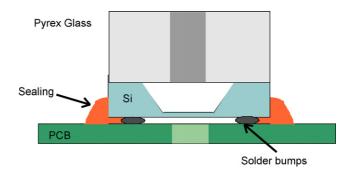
Cross-sectional drawing of a flip-chip soldered piezoresistive pressure sensor.
